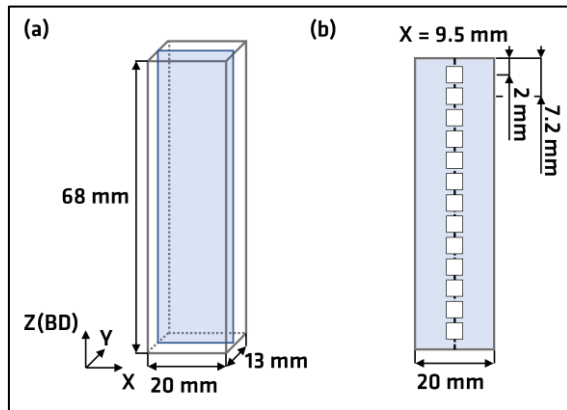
a) Dimensions of the as-built blank and position of the measurement plane, b) ND measurement positions along the height. The drawings are not to scale.
